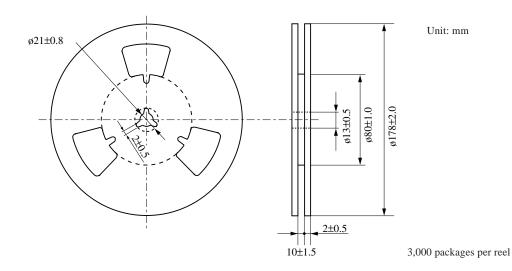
Embossed Taping Reel Dimensions for Mini Type Package
